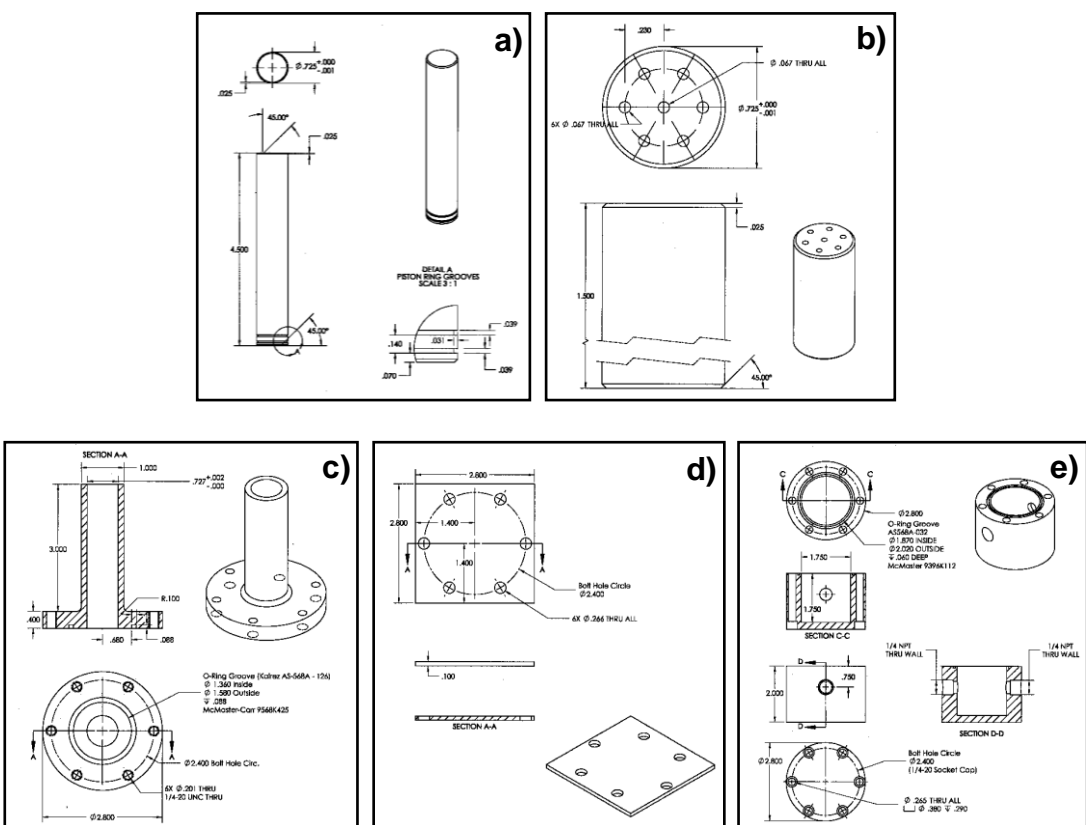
Mold Schematic created using SolidWorks 2007®; a) solid piston; b) small piston with holes; c) top part of the mold; d) chill plate and; e) bottom reservoir.
